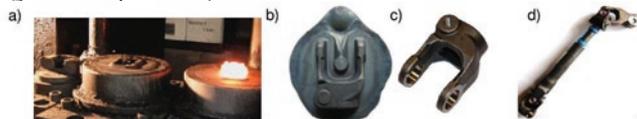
The general view of: a) the process of producing a yoke type forging – photo of the lower die insert with the preform placed in the insert's impression before the finishing forging, b) a yoke type forging with the flash, c) a ready detail – after mechanical treatment, d) a fragment of the steering column with the yoke
